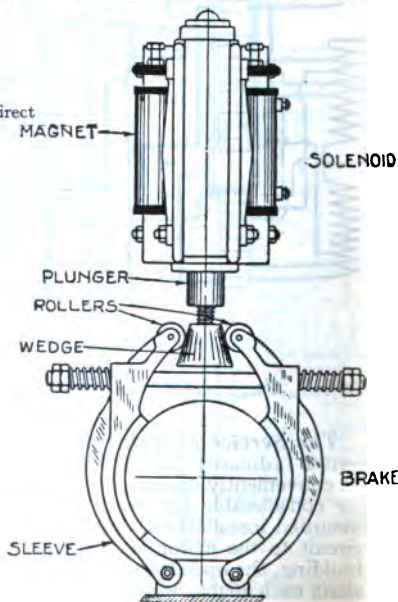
,262.—Typical arrangement of brake magnet having a wedge acting between rollers to release the brake.
